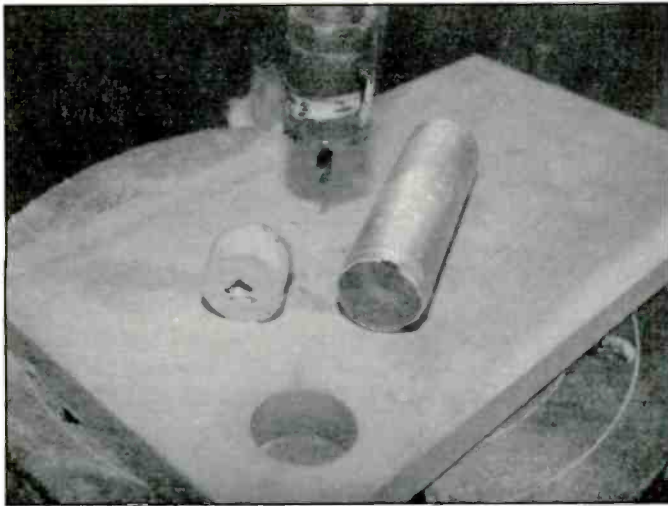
A new mounting base is made from a 3/4" pine plug cut with a hole saw.
